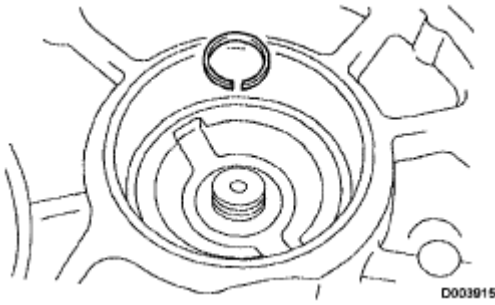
Installing Oil Seal Ring To Transaxle Housing
